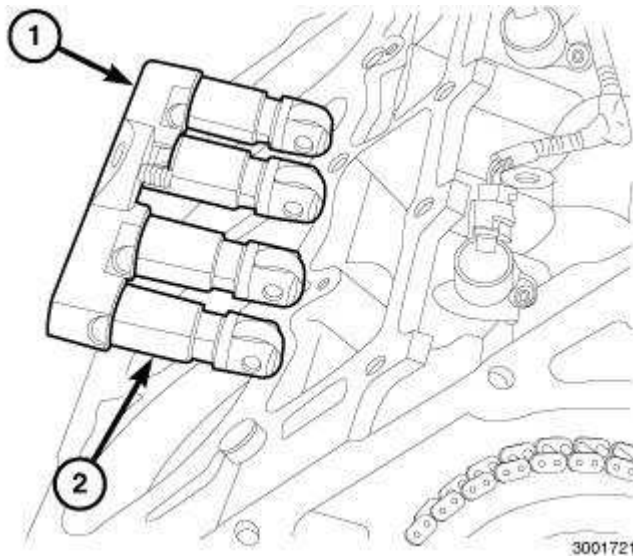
Hydraulic Lifters/Tappets & Retainer/Guide Holder
